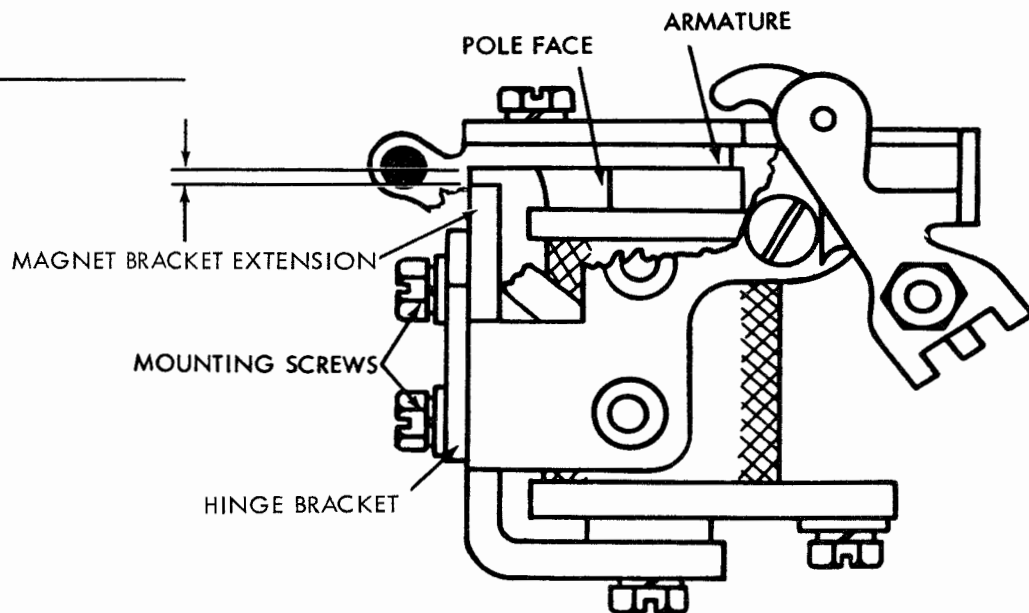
H. TYPING REPERFORATOR TT-373/UG, TT-375/UG, POWER DRIVE BACKSPACE MECHANISM FOR FULLY PERFORATED TAPE
